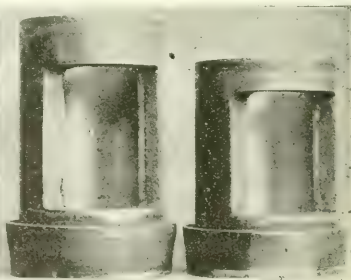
MALLEABLE IRON SHELL, BABBITT LINED BEARING
